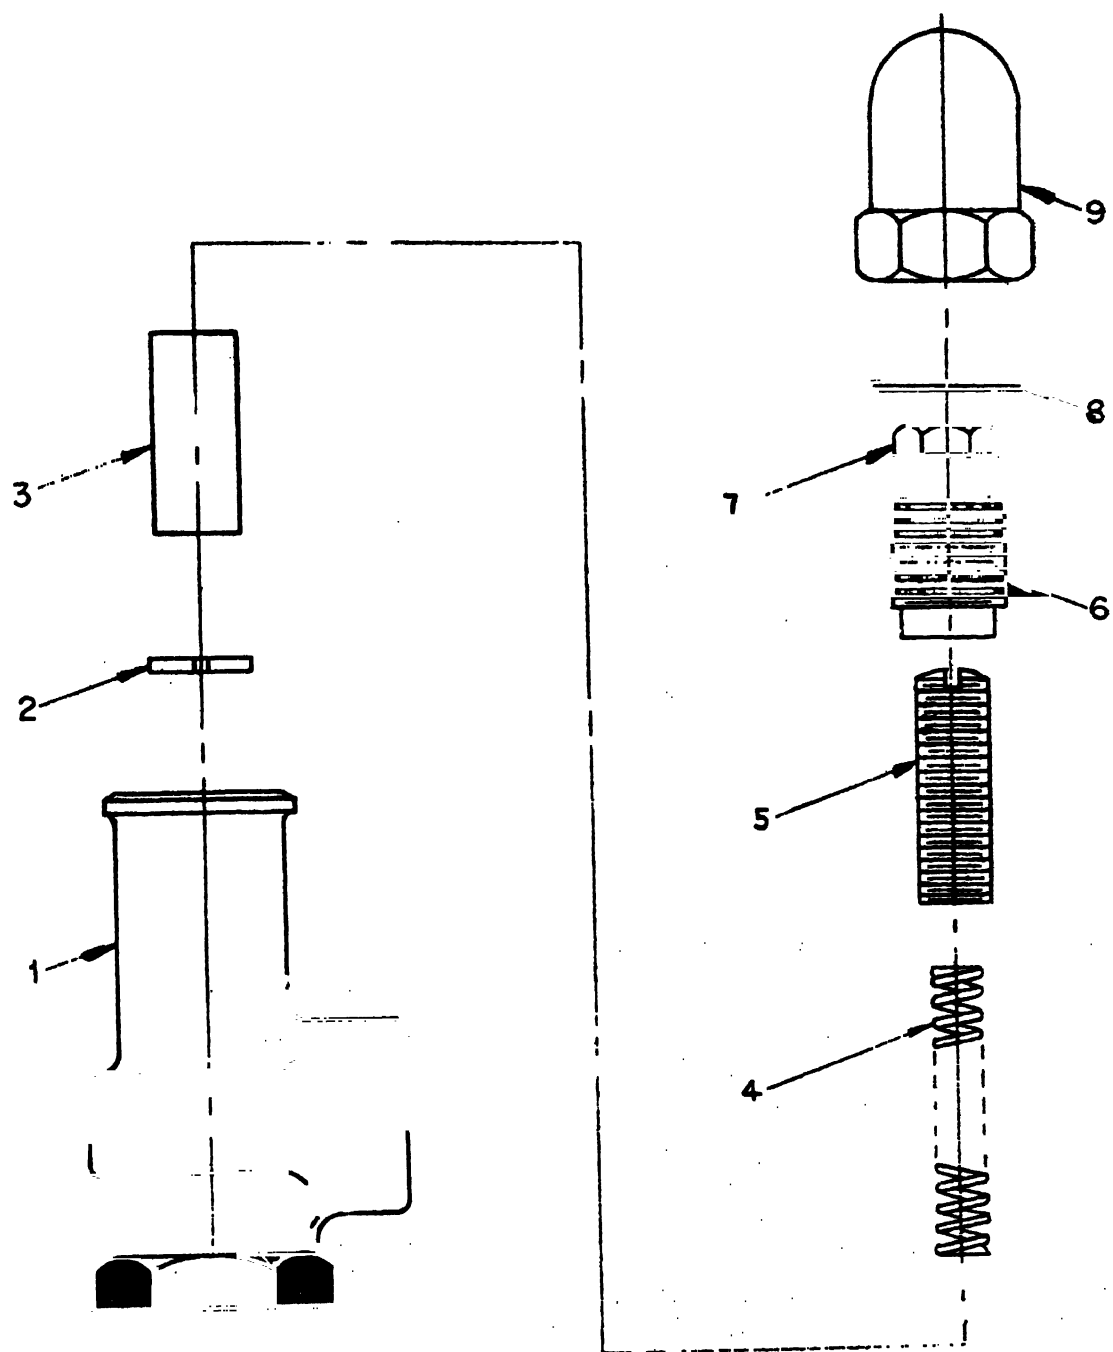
RELIEF VALVE ASSEMBLY AND DISASSEMBLY.
